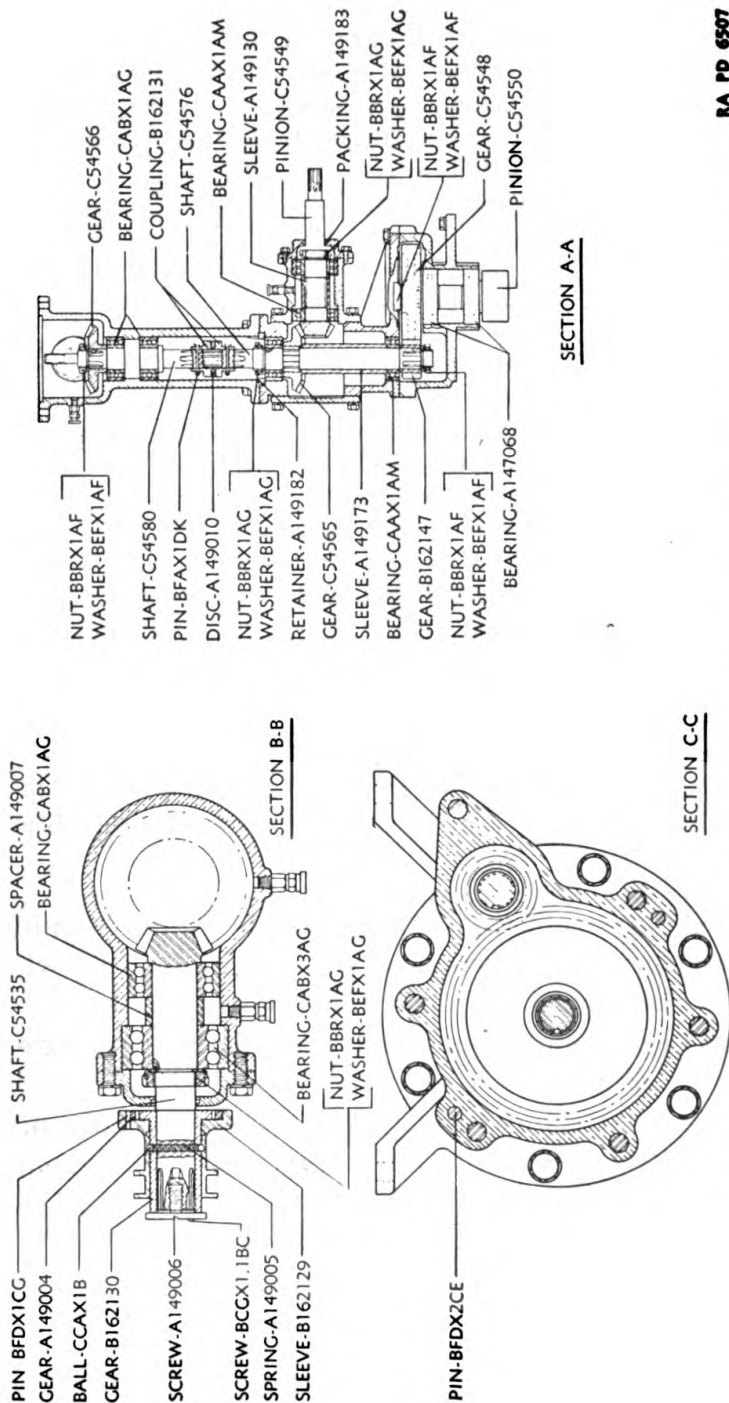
Traversing mechanism sections, M3A1 carriage (sections pertain to fig. 25).
